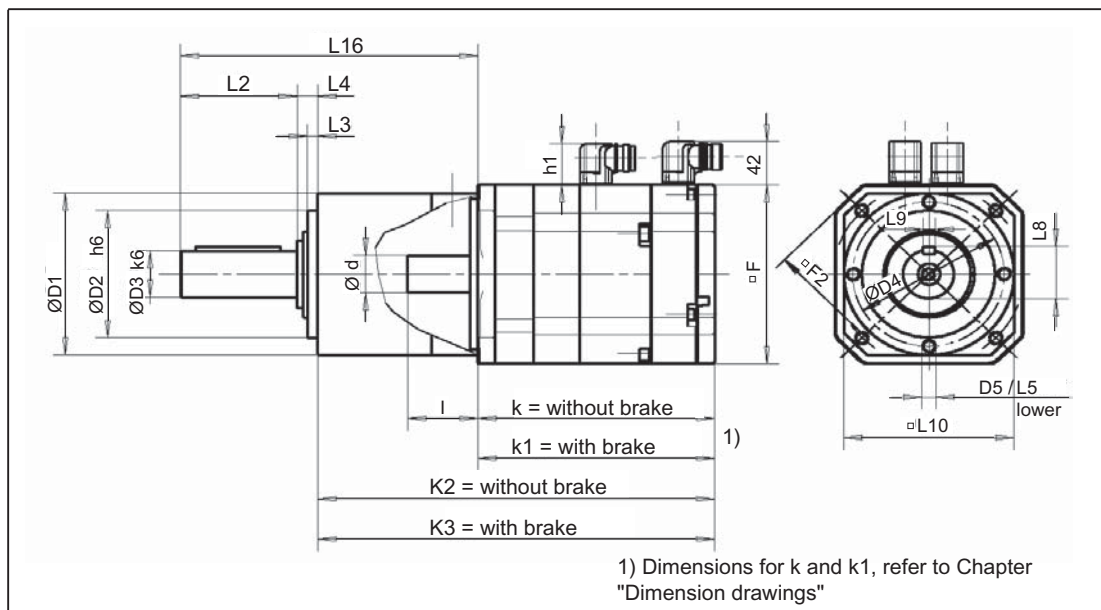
Dimensions 1FK7 CT and 1FK7 HD motor with planetary gearbox
